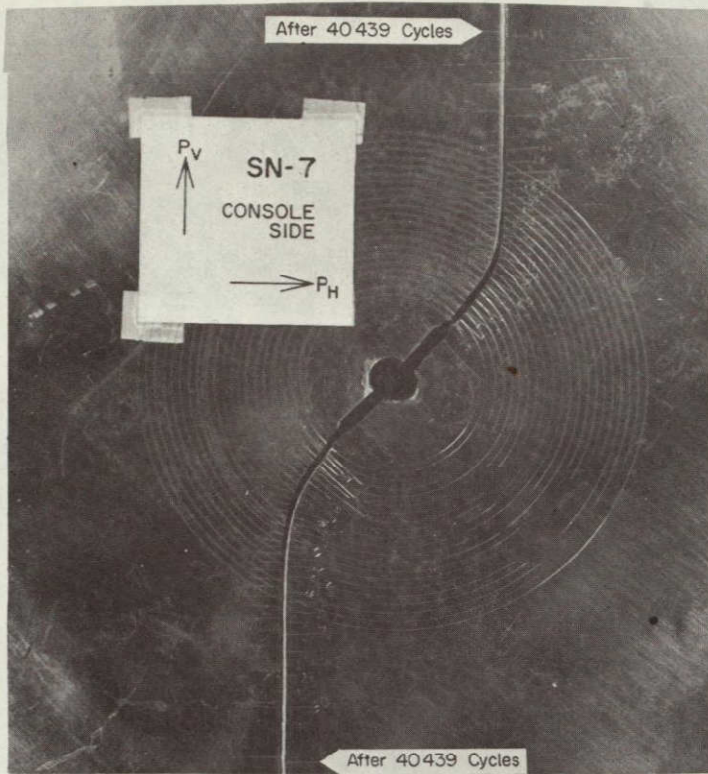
Closeup of SN-7 after Testing, Console Side .
